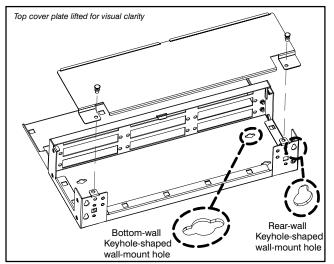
Top/Rear View Showing Keyhole Mounting Holes
